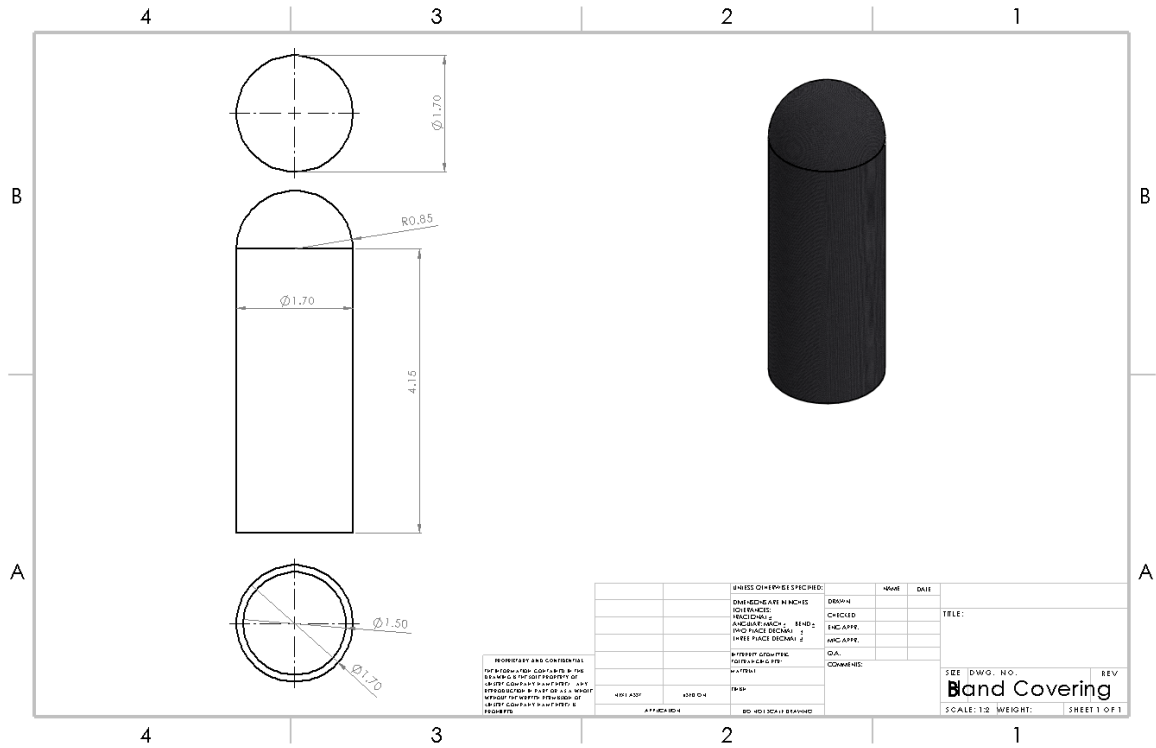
The sketch and dimensions of the band covering of the handlebars.
